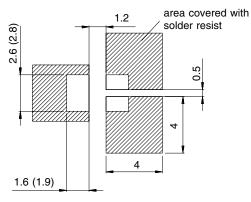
Issue: 3; 31.03.08
